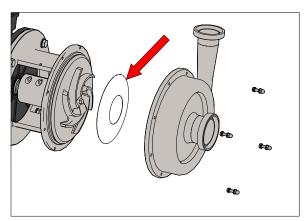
Install back casing, impeller, insert spacer ring tool [13-MT]. Install casing, screw every second casing mounting screws nuts and washers.
